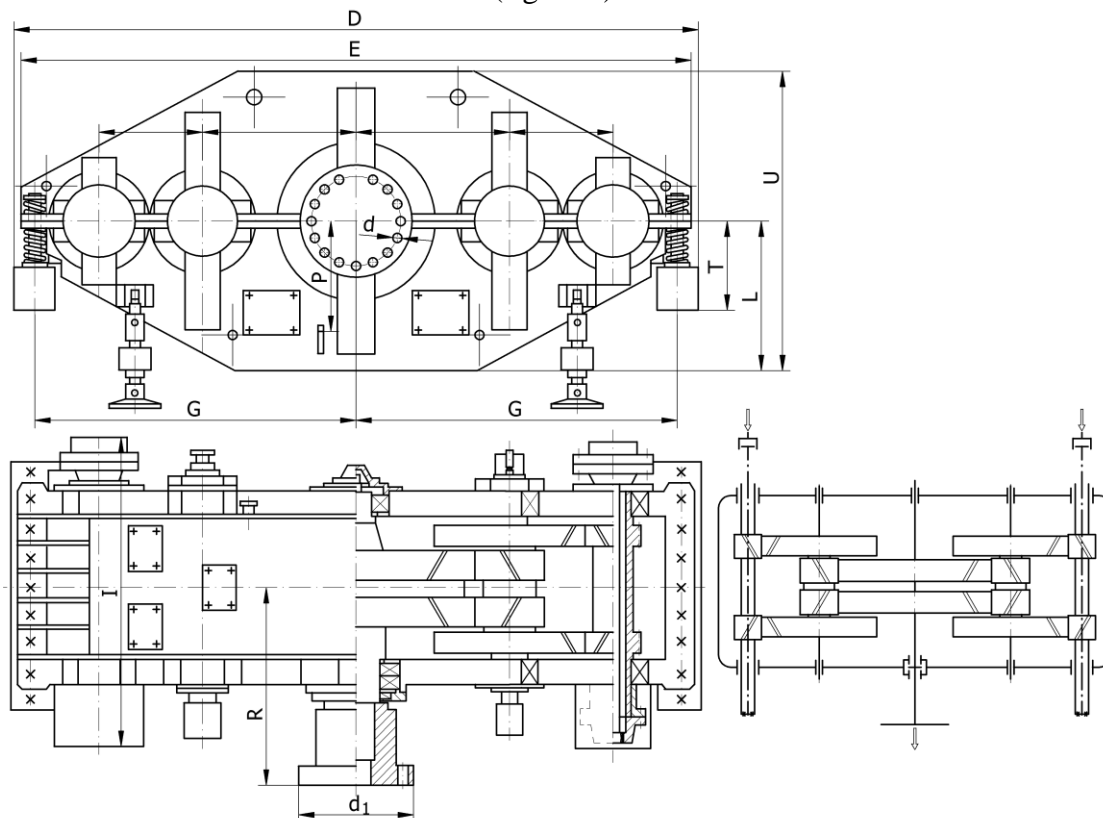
The construction and the dimensions of the extraction machine's reducer.
